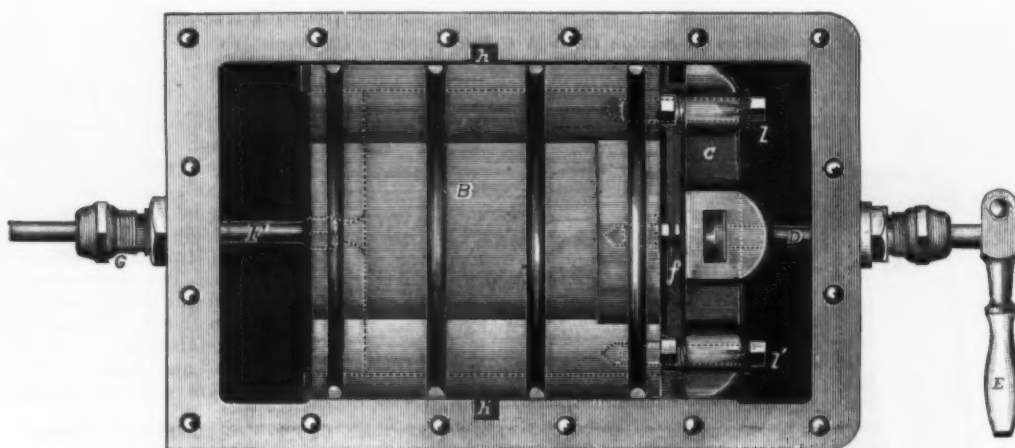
View of Relief Plate at Back, with Steam Chest Cover Removed.
